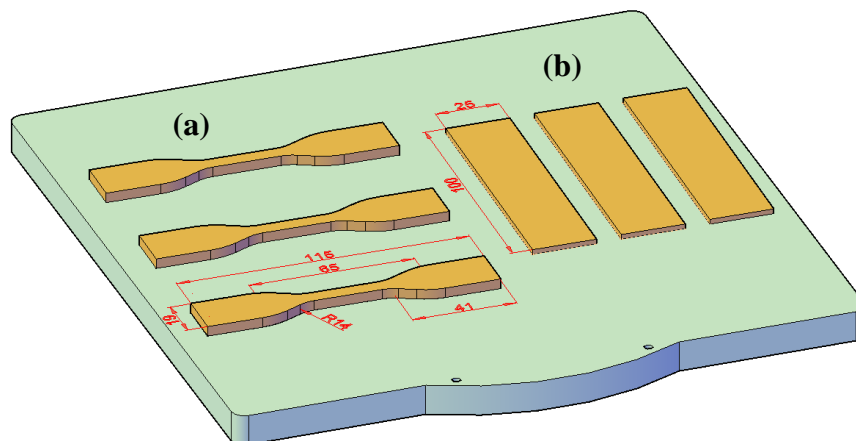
Tensile specimens and bonding plates dimensions (mm)
